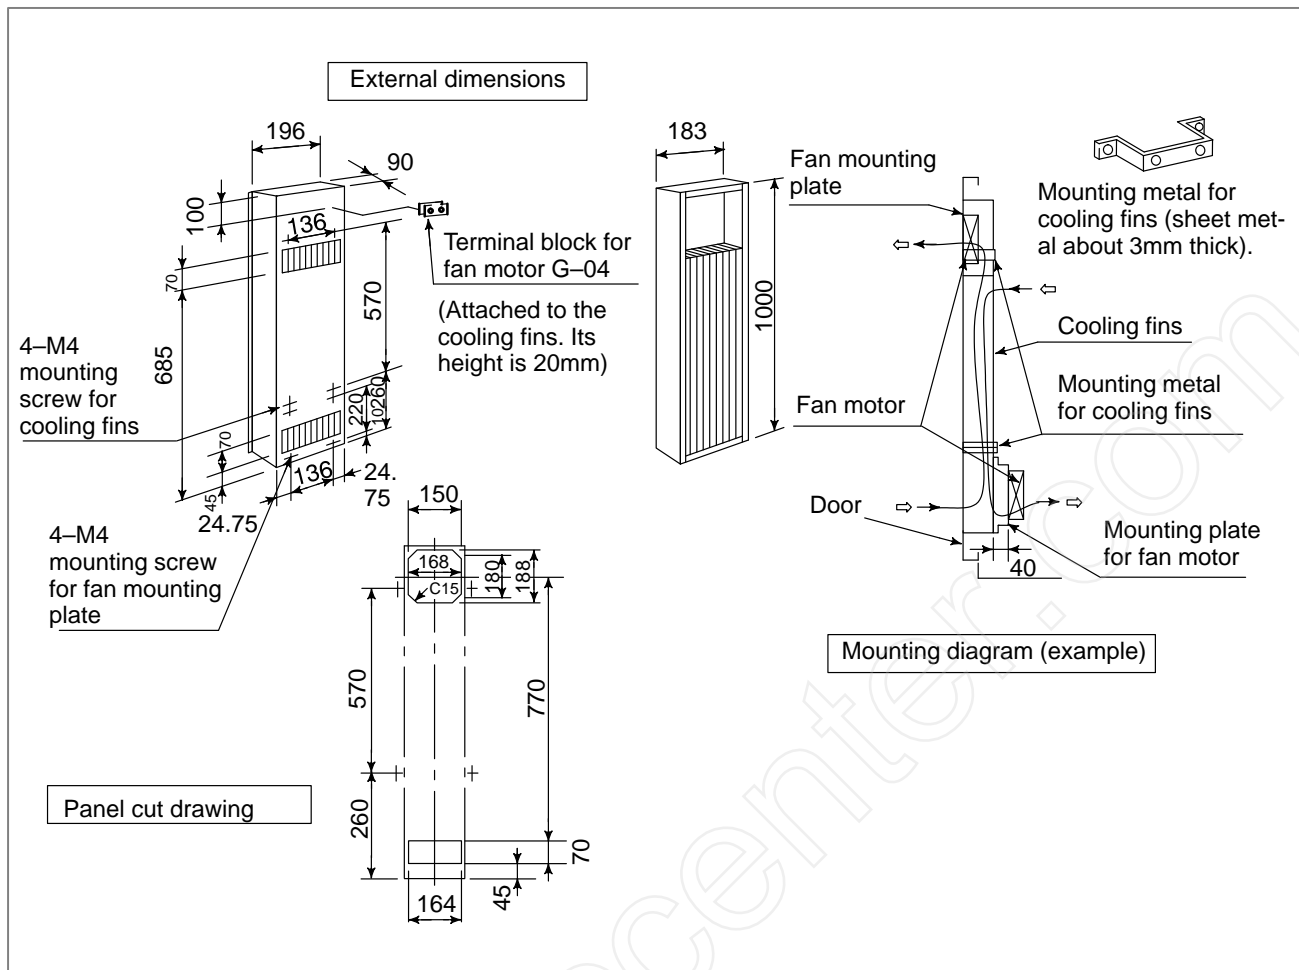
(c) External dimension and mounting method of cooling fin (A02B-0053-K303)
